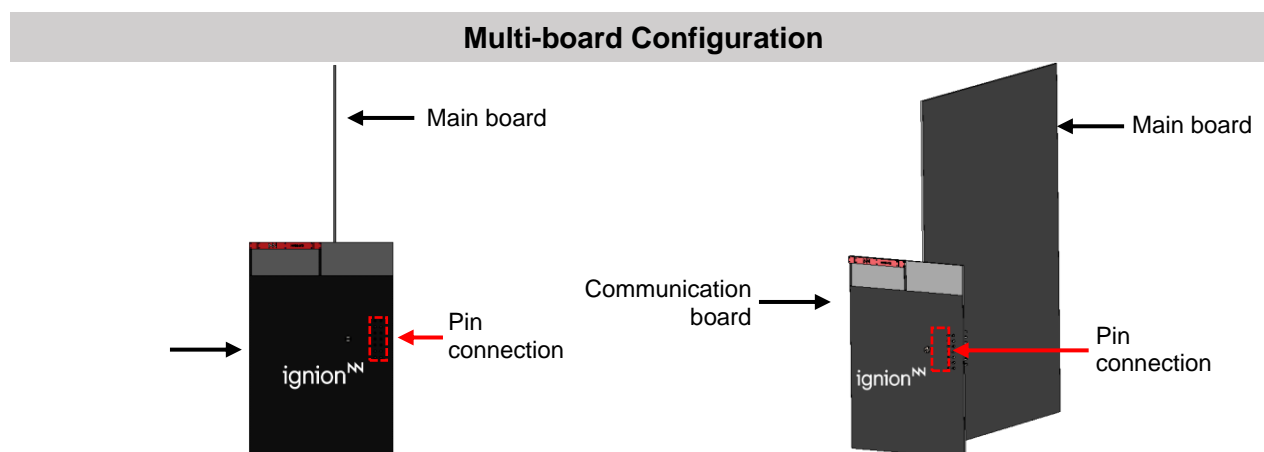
Main board with dimensions of 125 mm x 165 mm.
